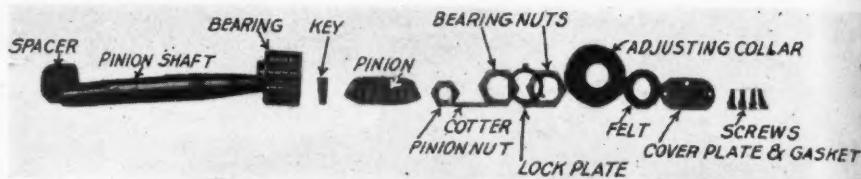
The Pinion Shaft Disassembled and Parts Arranged in Order of Assembly From Left to Right. Other Components of Pinion Flange Housing Are Shown in Order of Reassembly (Left to Right) at Right of Cotter Pin
